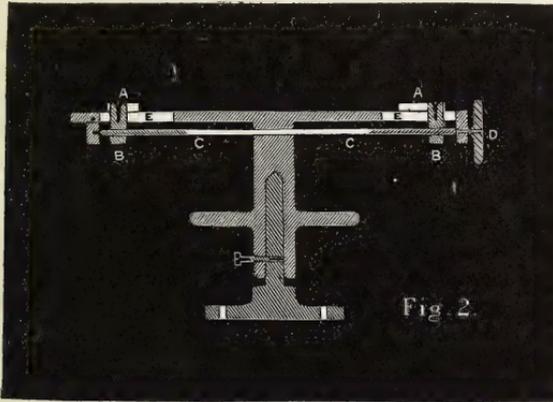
is the upper face of the table, and Fig. 2 is a perpendicular section through the line of the milled-head and spindle.
